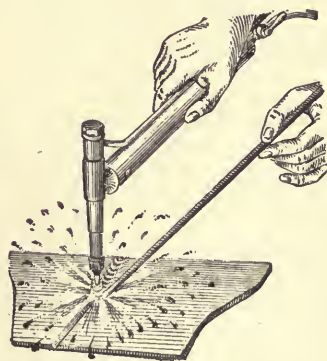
The flame is held perpendicular to the line of welding, with the white jet out of contact.
